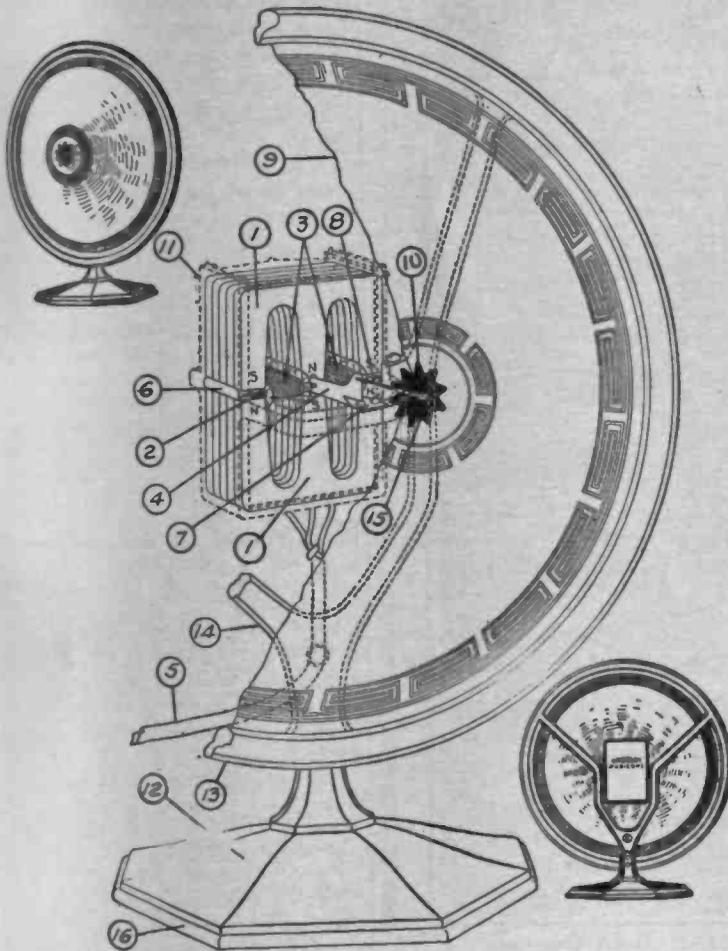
This Shows How Parts Are Assembled. Rear View in Lower Corner
